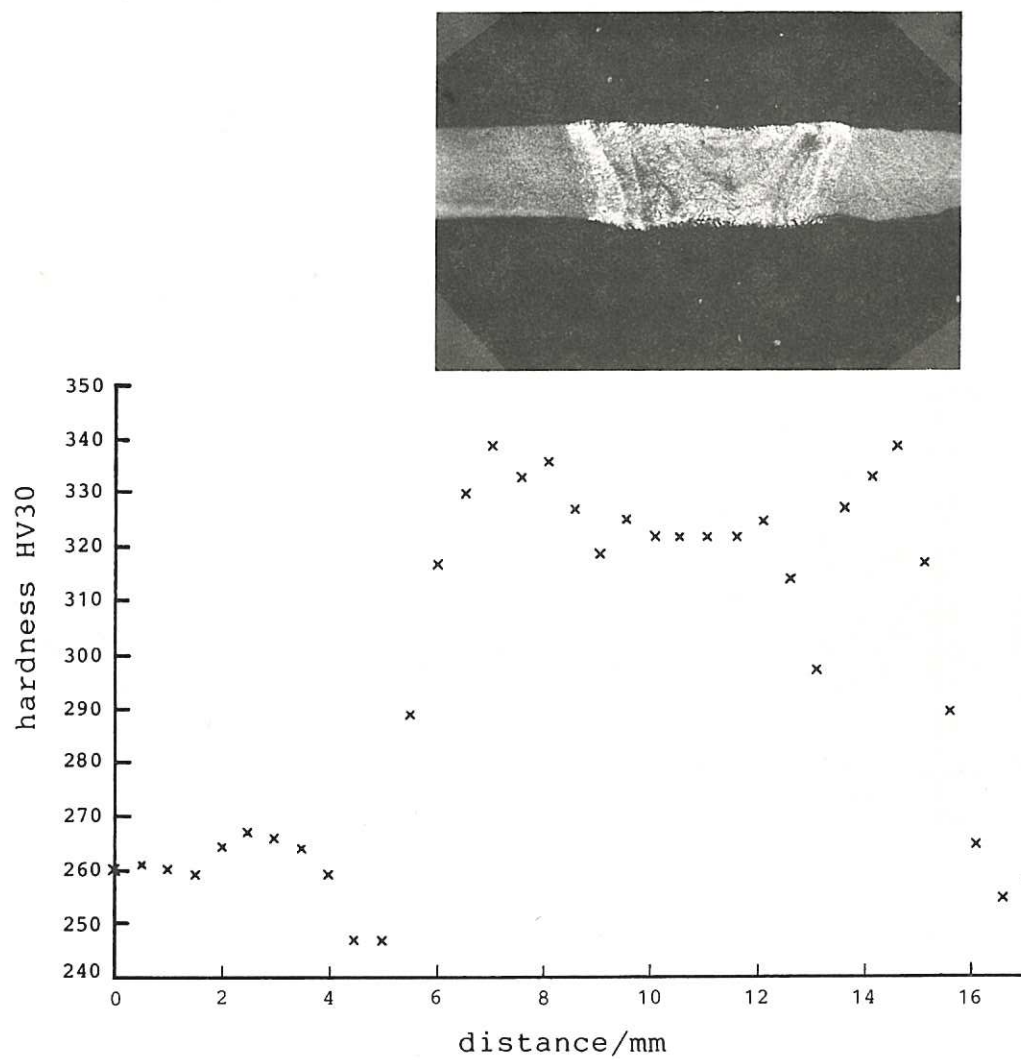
Hardness profile and macrophotograph of 2 mm thick LA7 strip after post-weld heat treatment
